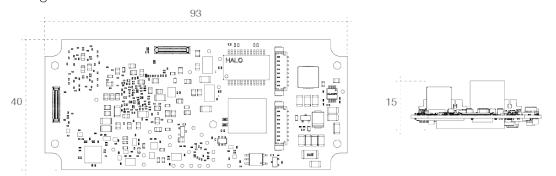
Top and Side Views for the FRAMOS D4 Visual Processing Board
